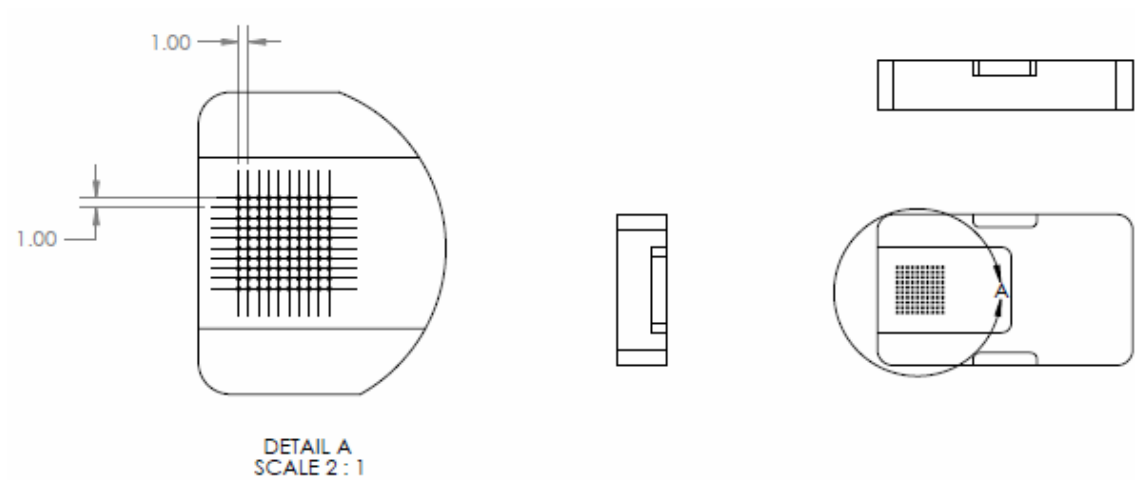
Mold with 1.0 mm square spacing pattern (dimensions in mm).
